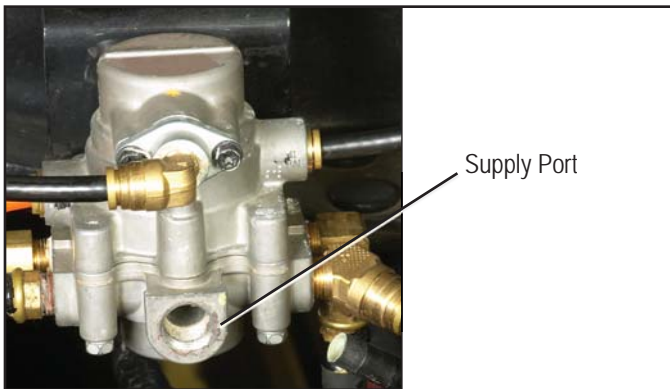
EXTERNAL SINGLE CHECK VALVE REMOVED
